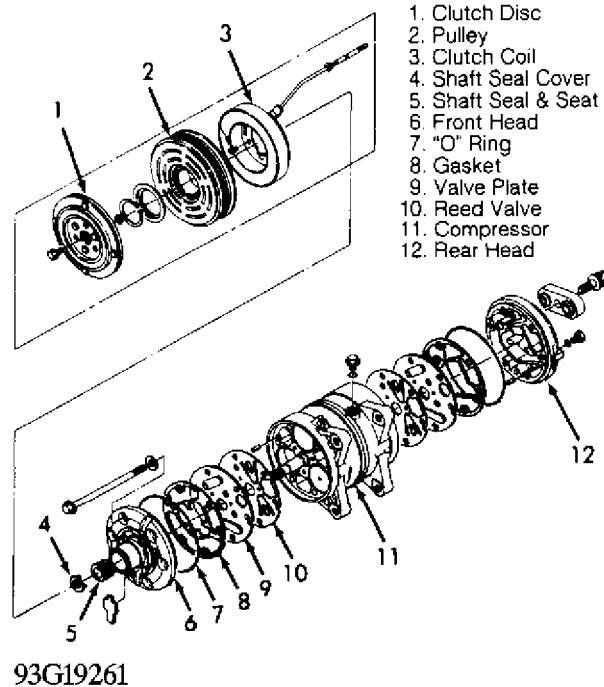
Exploded View Of Compressor (Diesel Kiki 6-Cylinder)
